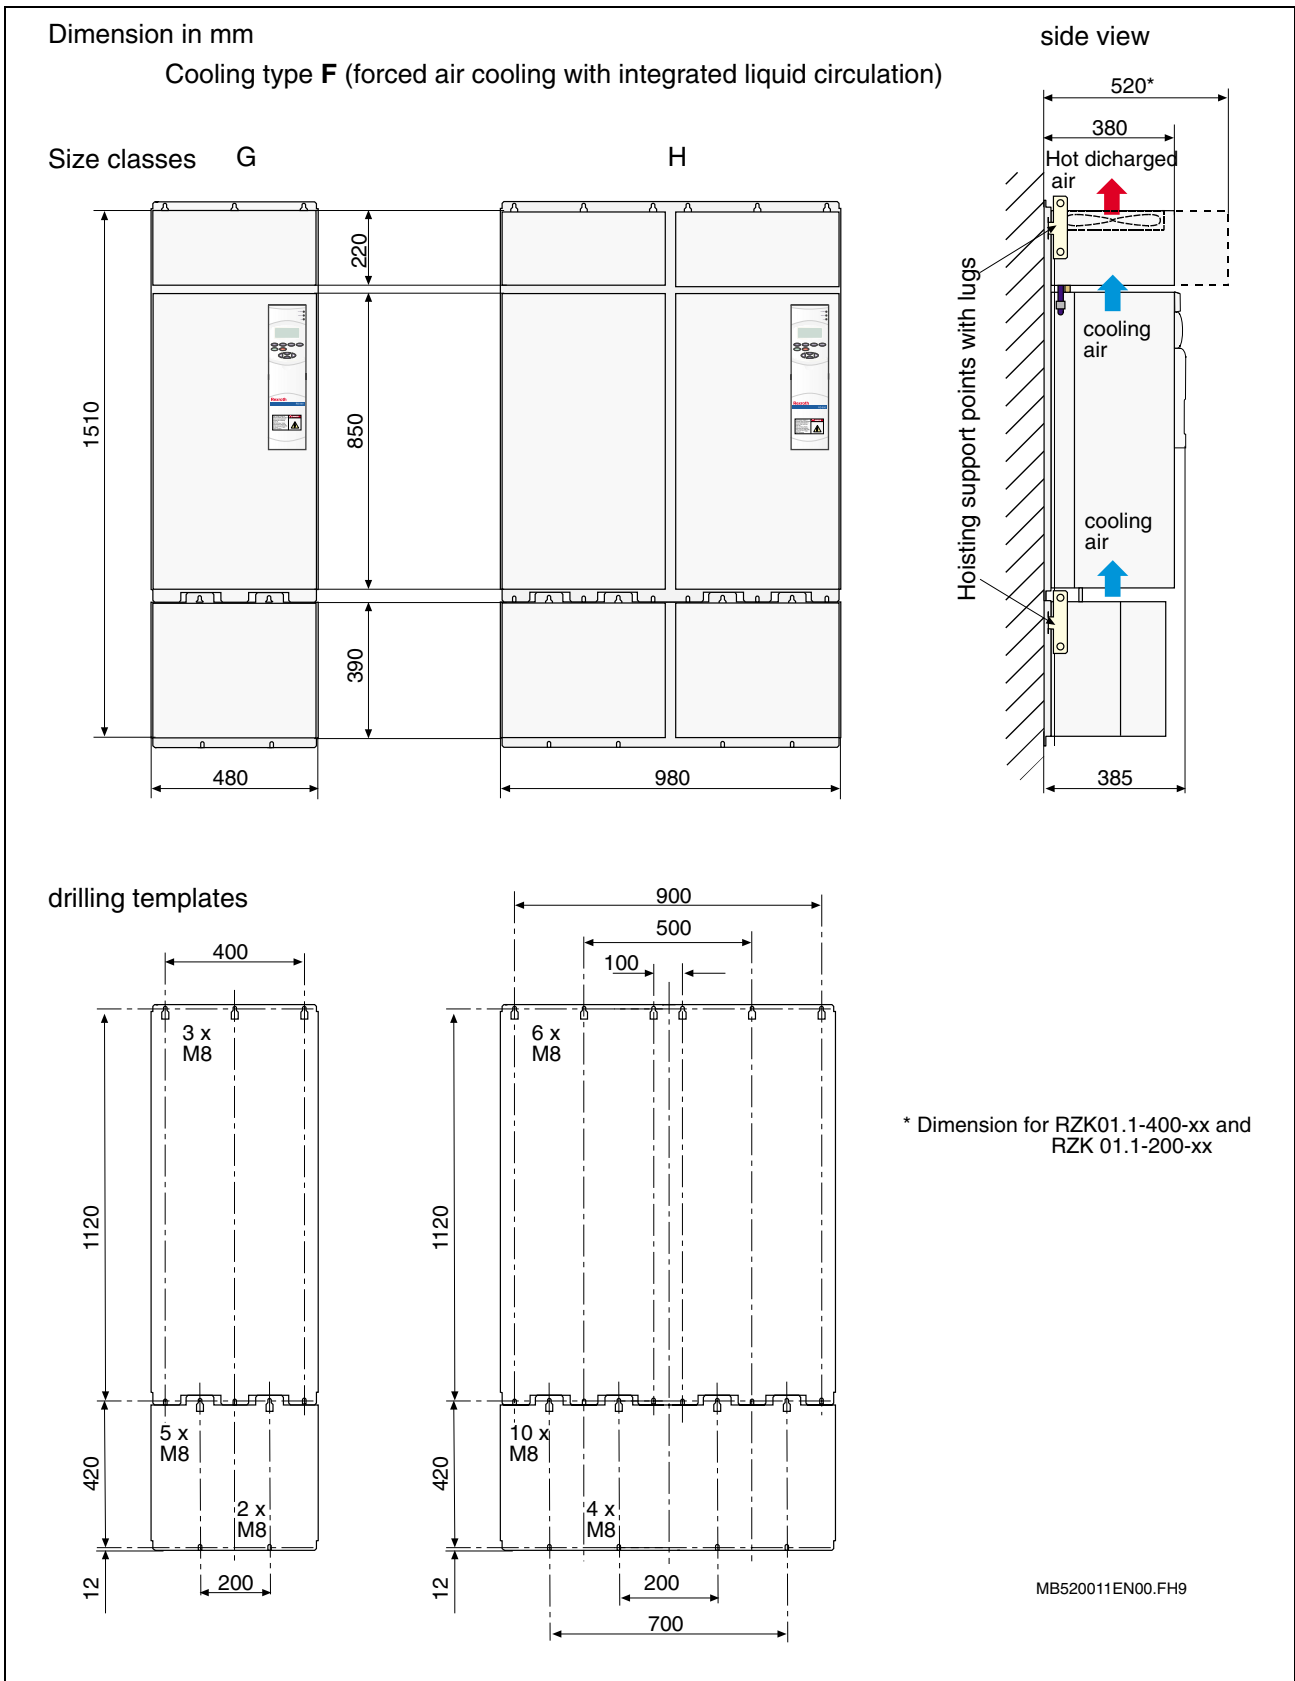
Dimension sheet of converter, size classes G and H, with cooling type F
